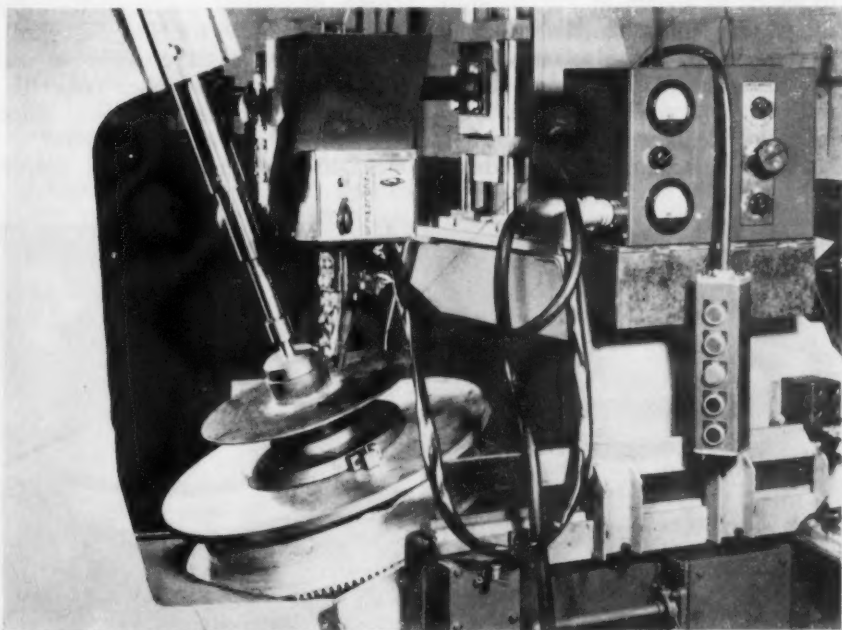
Sheared and punched disc is assembled to turned hub barrel and welded automatically on both sides in the submerged arc welding setup, shown herewith.
